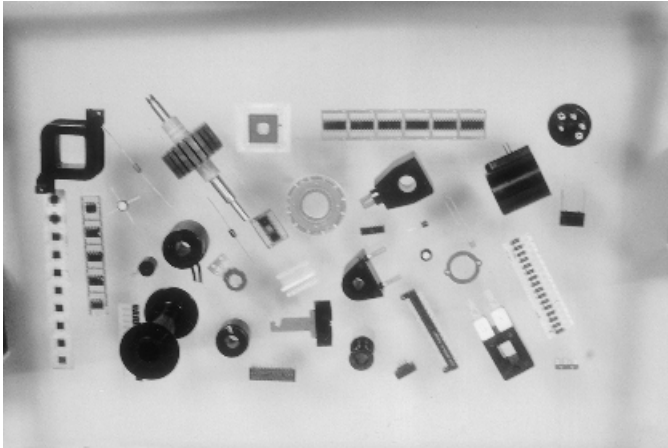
Typical electrical and electronic components encapsulated by transfer molding (insert molding).
